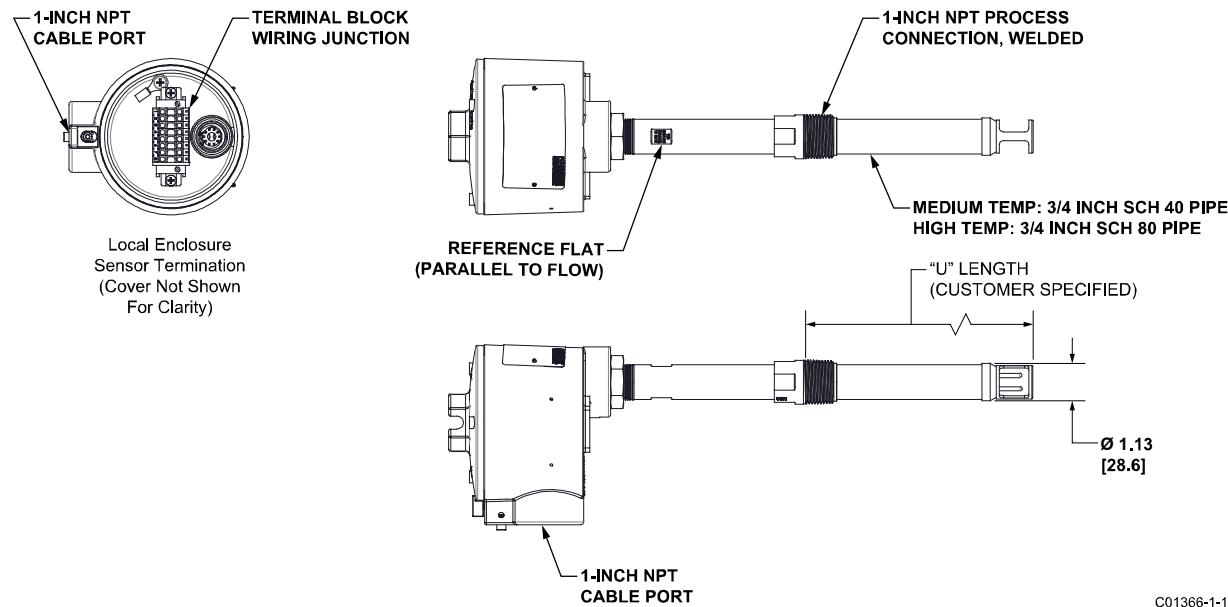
Single Point, Fixed 1" Welded NPT Process Connection
